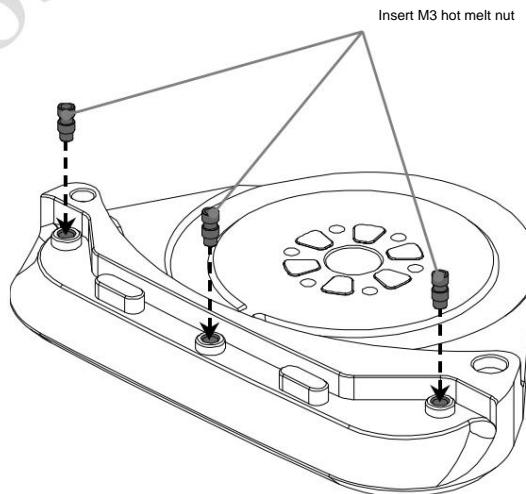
Angle view of the fan mounting at the front of the machine
